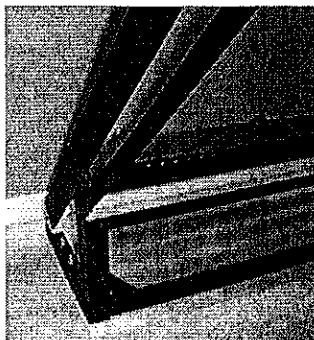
Photograph of assembled actuator mechanism attached to the floor assembly.
